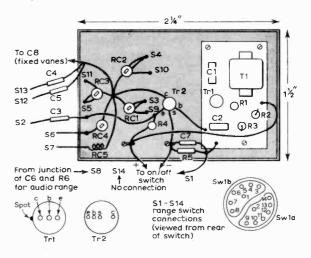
Layout showing the r.f. oscillator coils and audio oscillator panel.
